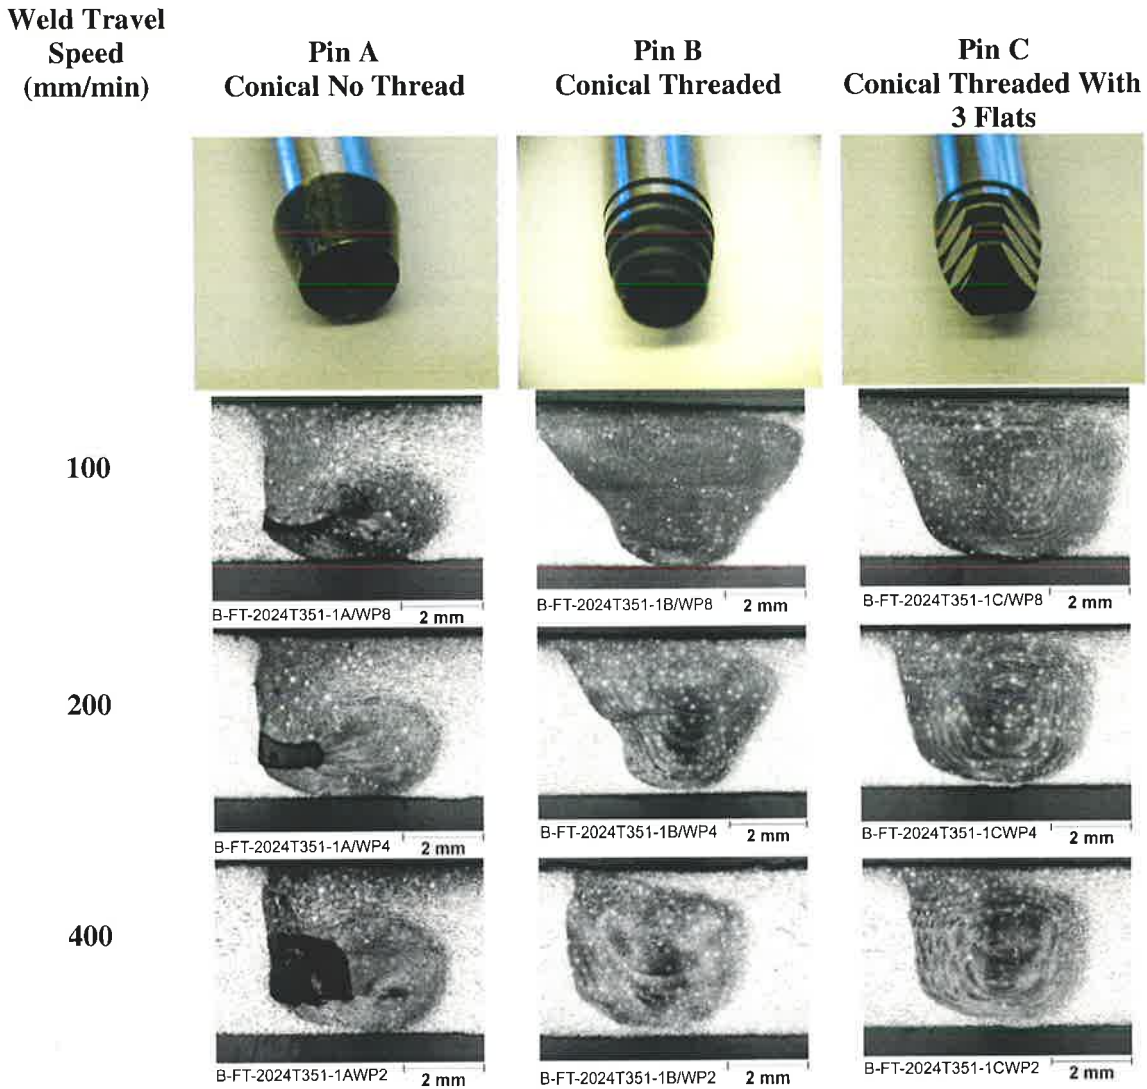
Weld macrographs produced using tool pins A, B and C [117].
